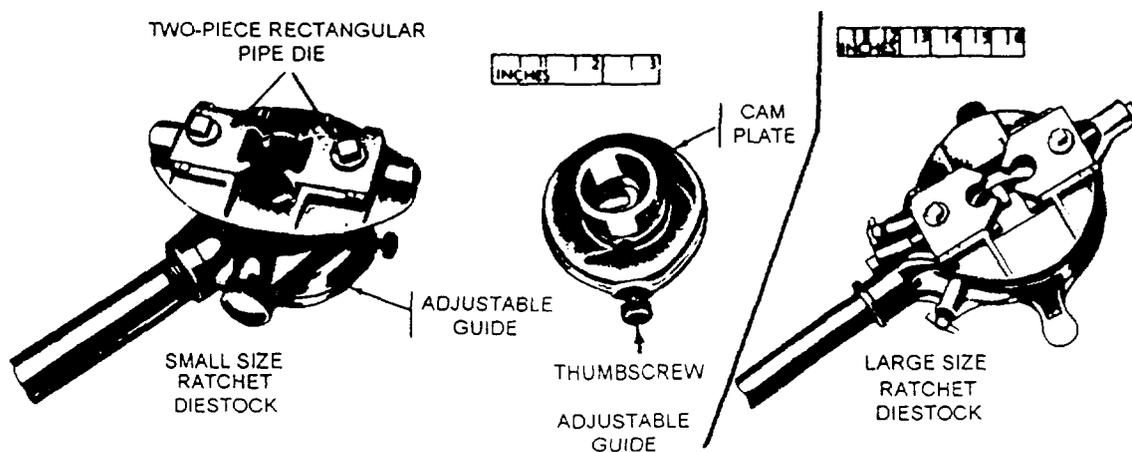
Adjustable die guide and ratchet diestocks.
